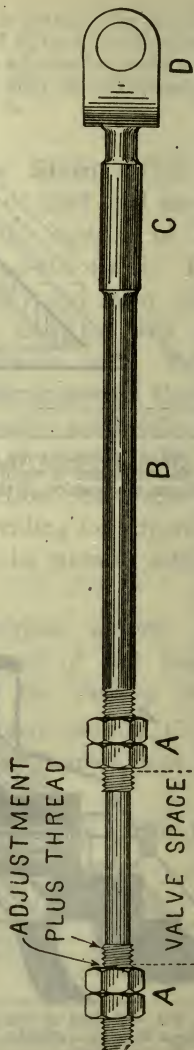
Form of valve stem for direct connection without yoke. There are two pairs of adjustment nuts A, A; the diameter of the rod between the threaded sections is reduced to make a plus thread at the end.
